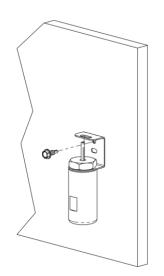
Hanging Bracket Wall Installation (Customer Provided Screws)
